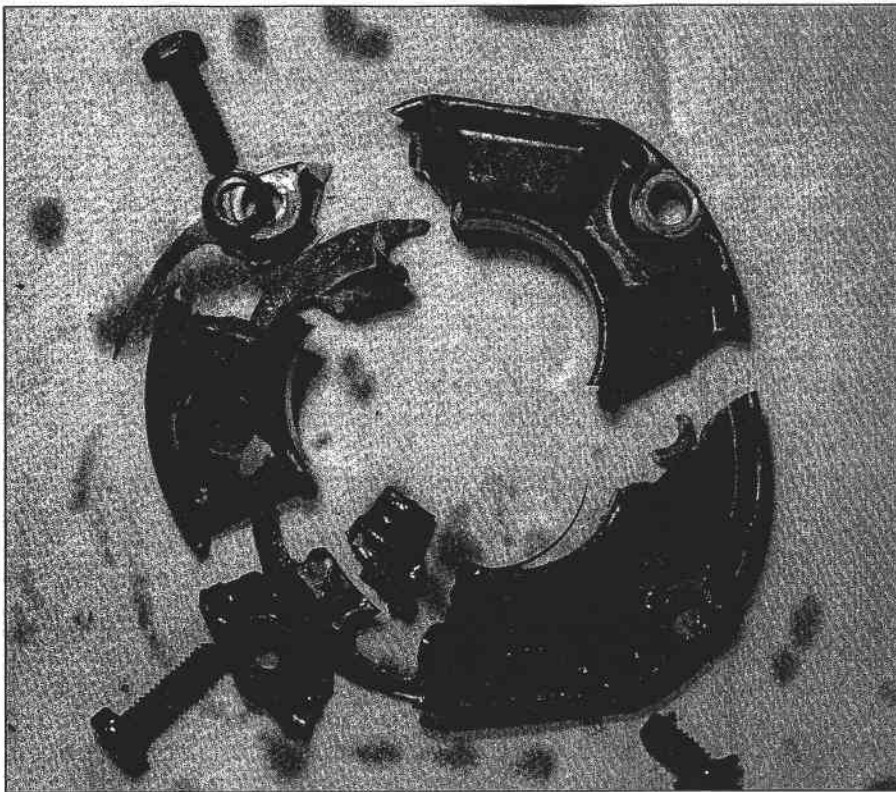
Exemplar gear box - fractured input bearing cap after shear loading
